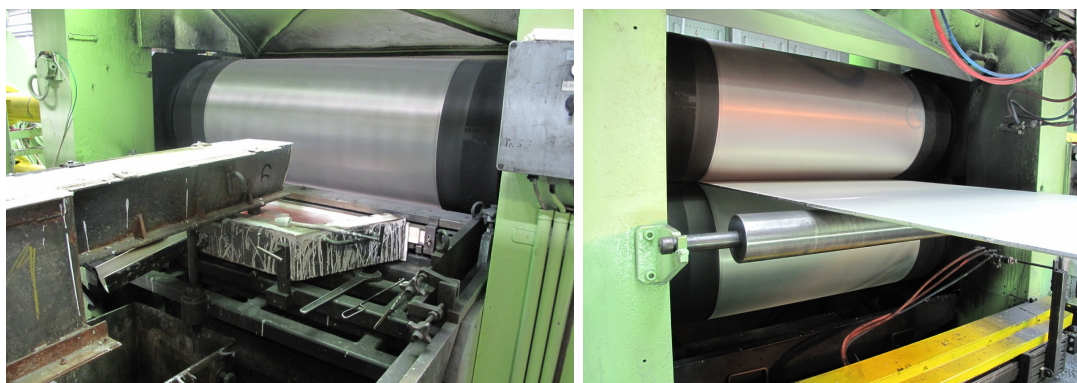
Twin-roll casting in factory conditions: pouring of the melt between the rolls and a freshly solidified sheet.
